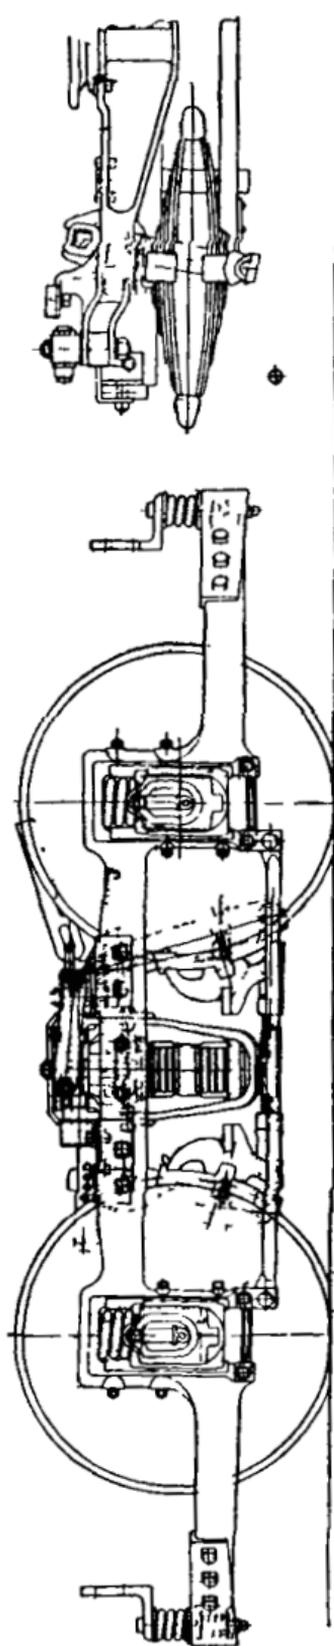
Swivel truck with forged steel side frames and elliptic springs under swinging bolster.
